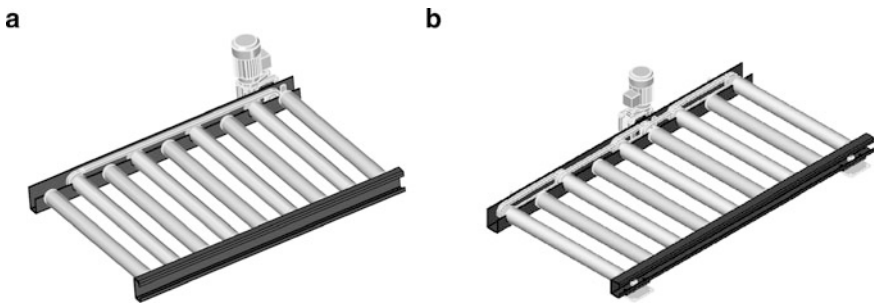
Arrangement on real conveyor (a) tangential and (b) chain to chain
